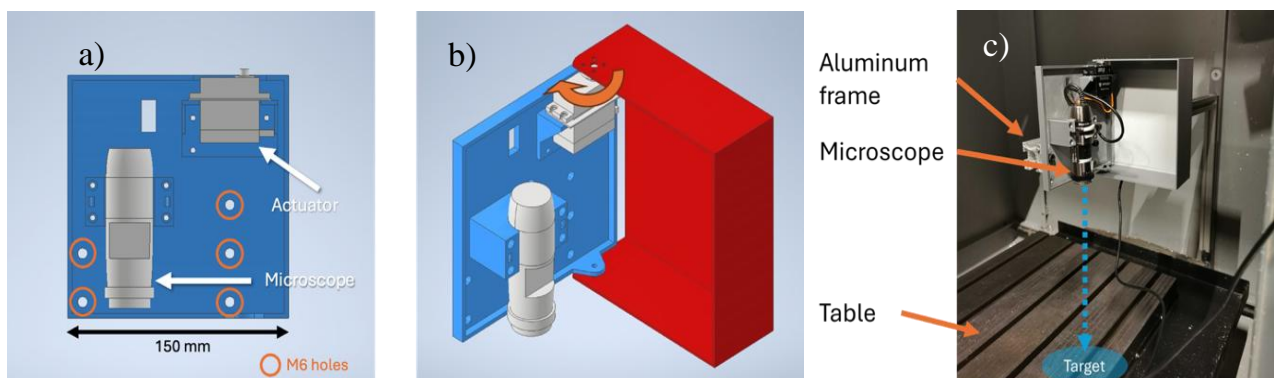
OMSM assembly, a) Front view without the cover, b) Projection view with the actuated cover, c) OMSM assembly in machining chamber, example
